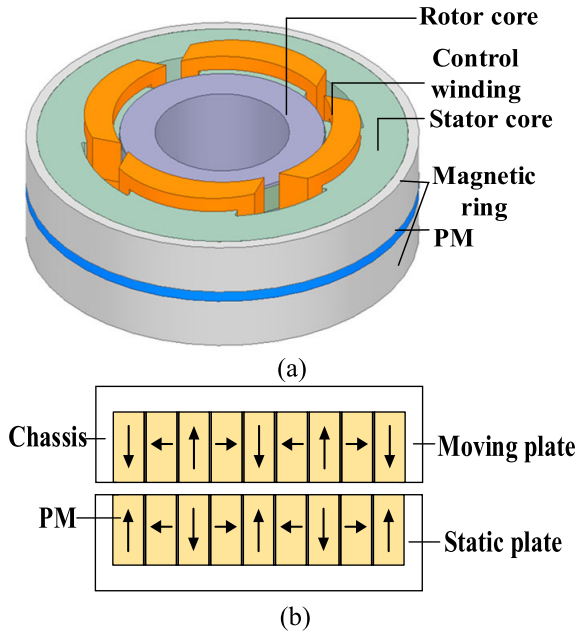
The structure of bearing. (a)PMRMB (b) Axial PMB.
